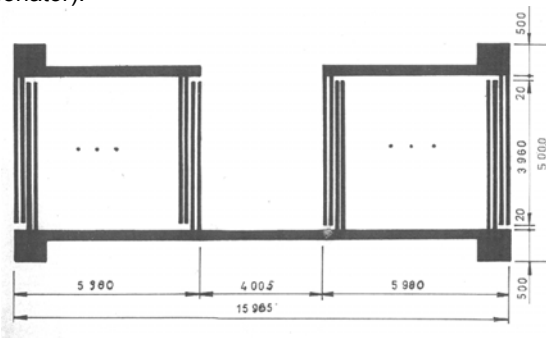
Delay line DL PLO 41 design drawing (all dimensions in μm)
